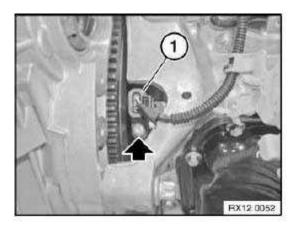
Identifying Crankshaft Cover Courtesy of BMW OF NORTH AMERICA, INC.
